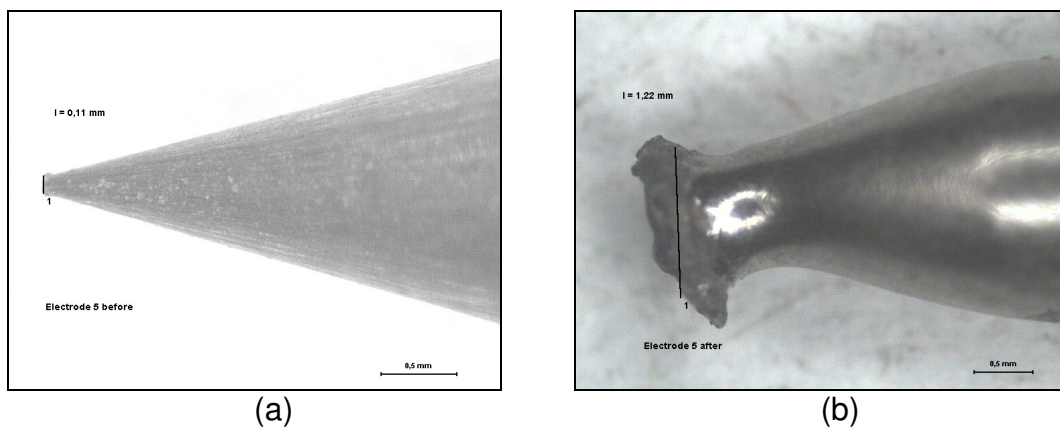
Angle of Electrode 5 used for experiment number 2: (a) before welding $\angle = 34,06^\circ$; (b) after welding $\angle > 34^\circ$.
